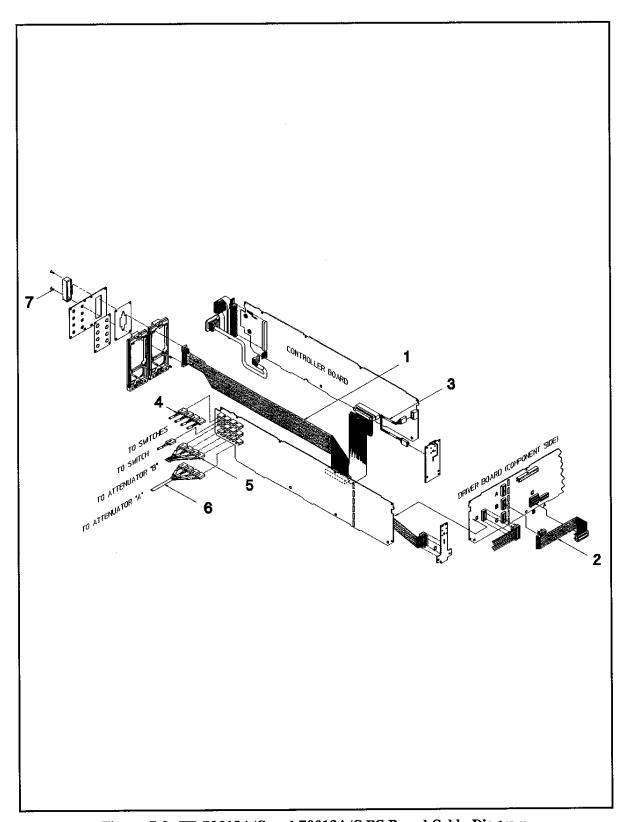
HP 70612A/C and 70613A/C PC Board Cable Diagram
